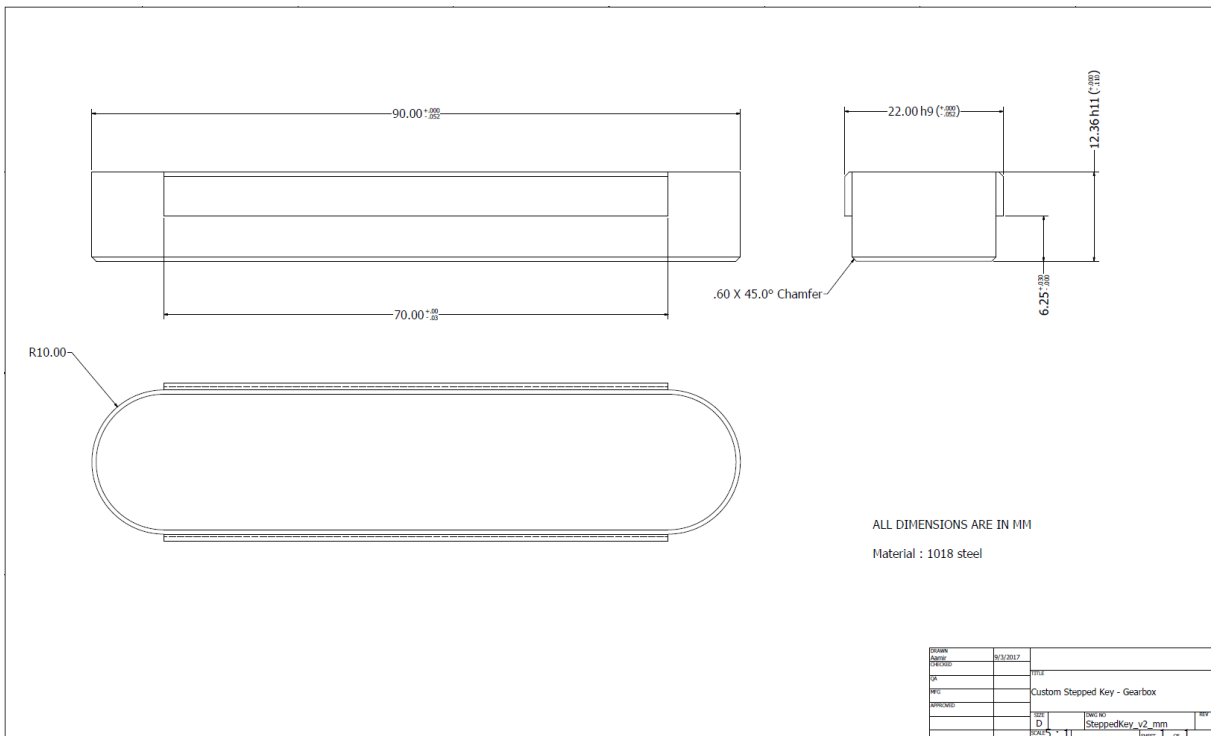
Custom stepped key for gearbox shaft and clutch hub assembly.
